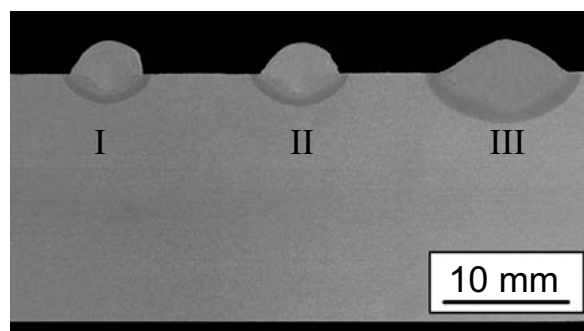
Macrostructure of overlay welds made with parameters presented in Table 1
